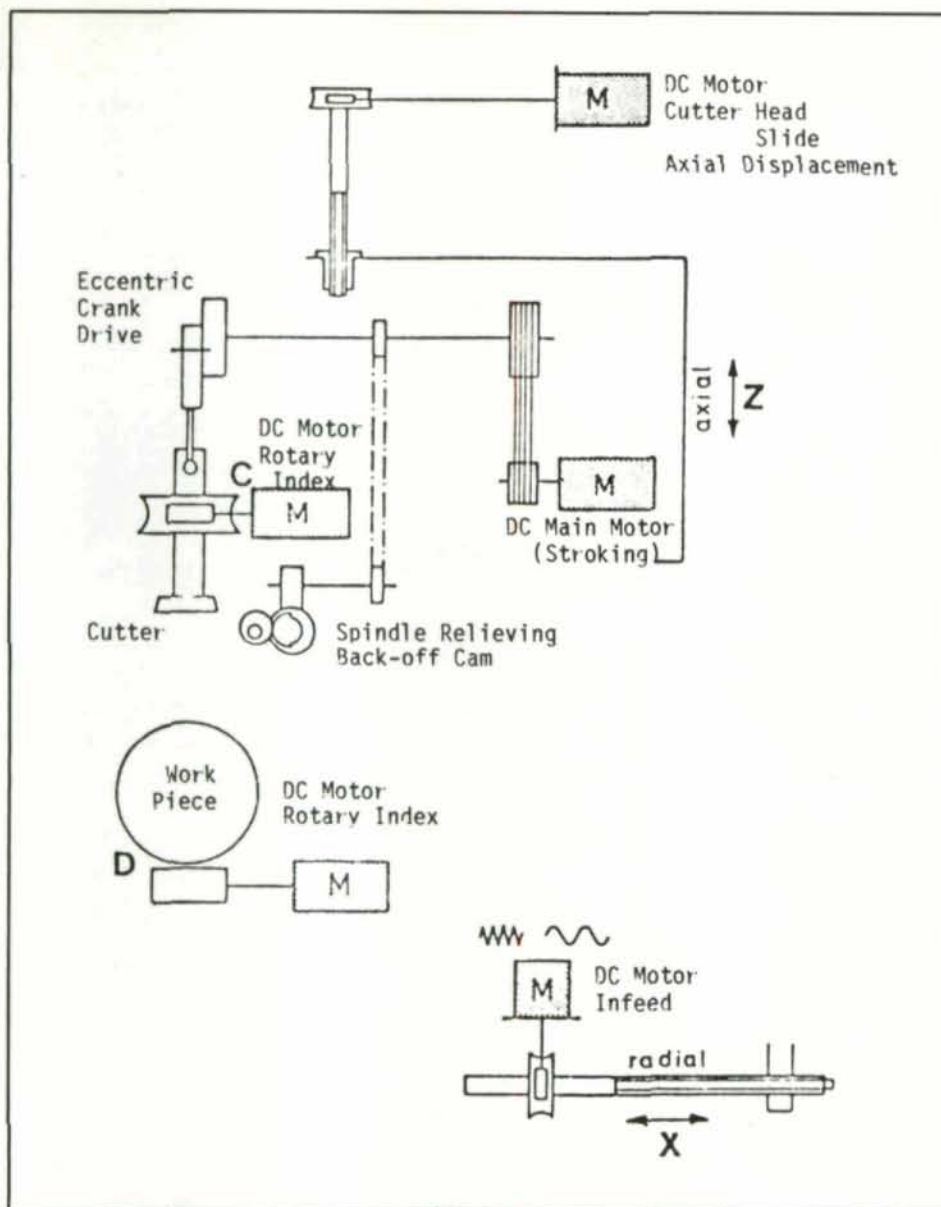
Kinematic drawing of gear drive train of a CNC gear shaper.
